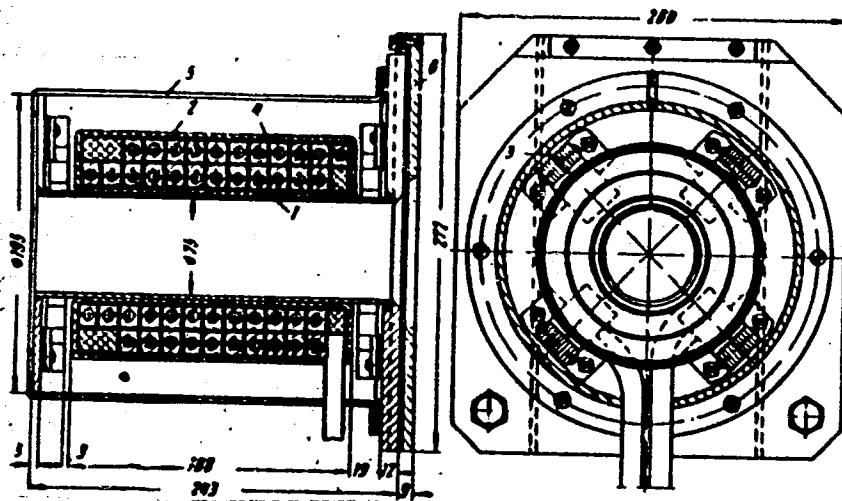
Inductor for hot rolling of tubes in KhPT-75 tube mill
